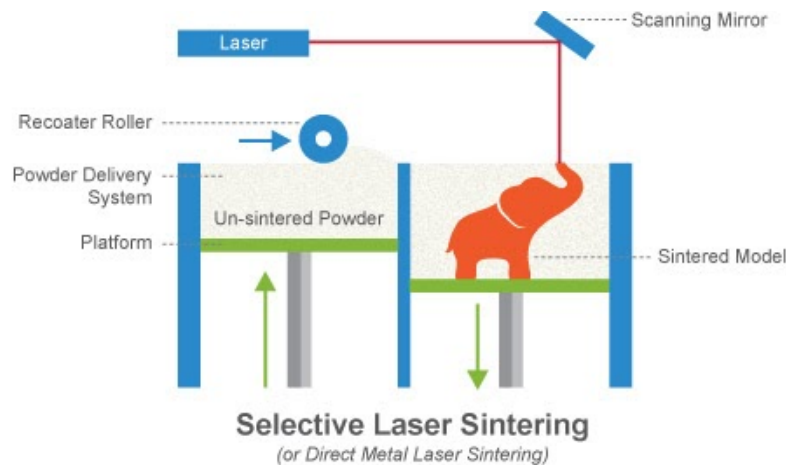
Diagram of a Selective Laser Sintering (or SLS) printer, a type of Granular Materials Binding (GMB) printer. Image courtesy of Mark Jaster; <https://www.printspace3d.com/3d-printing-processes/>
